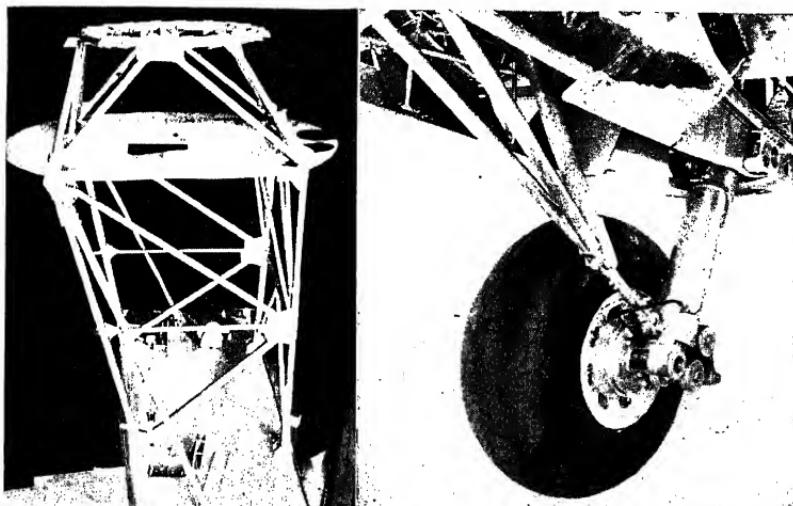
Additional parts repaired by electric welding. (Courtesy of The Lincoln Electric Company.)
